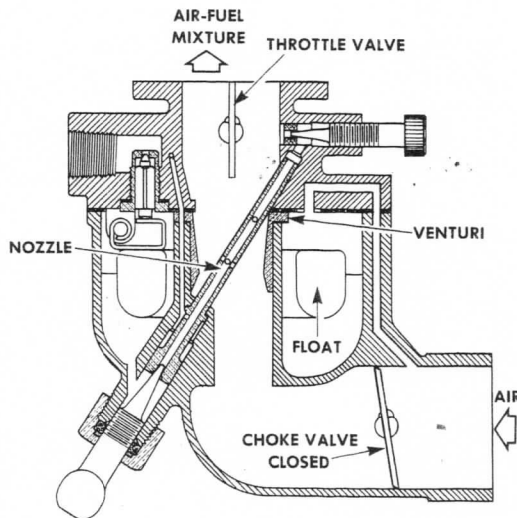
A closed choke valve causes a lot of fuel to be pulled out of the nozzle.
